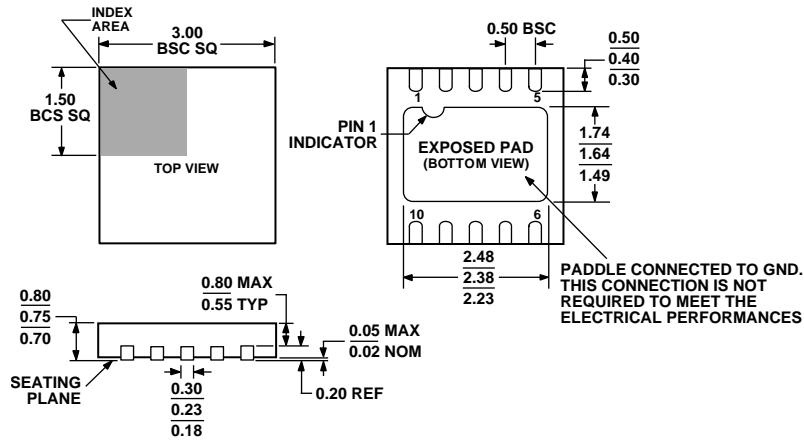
10-Terminal Quad Flat No Lead Package [QFN (LFCSP)]
